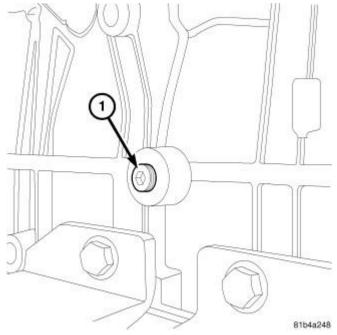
Engine Block Plug Courtesy of CHRYSLER LLC
